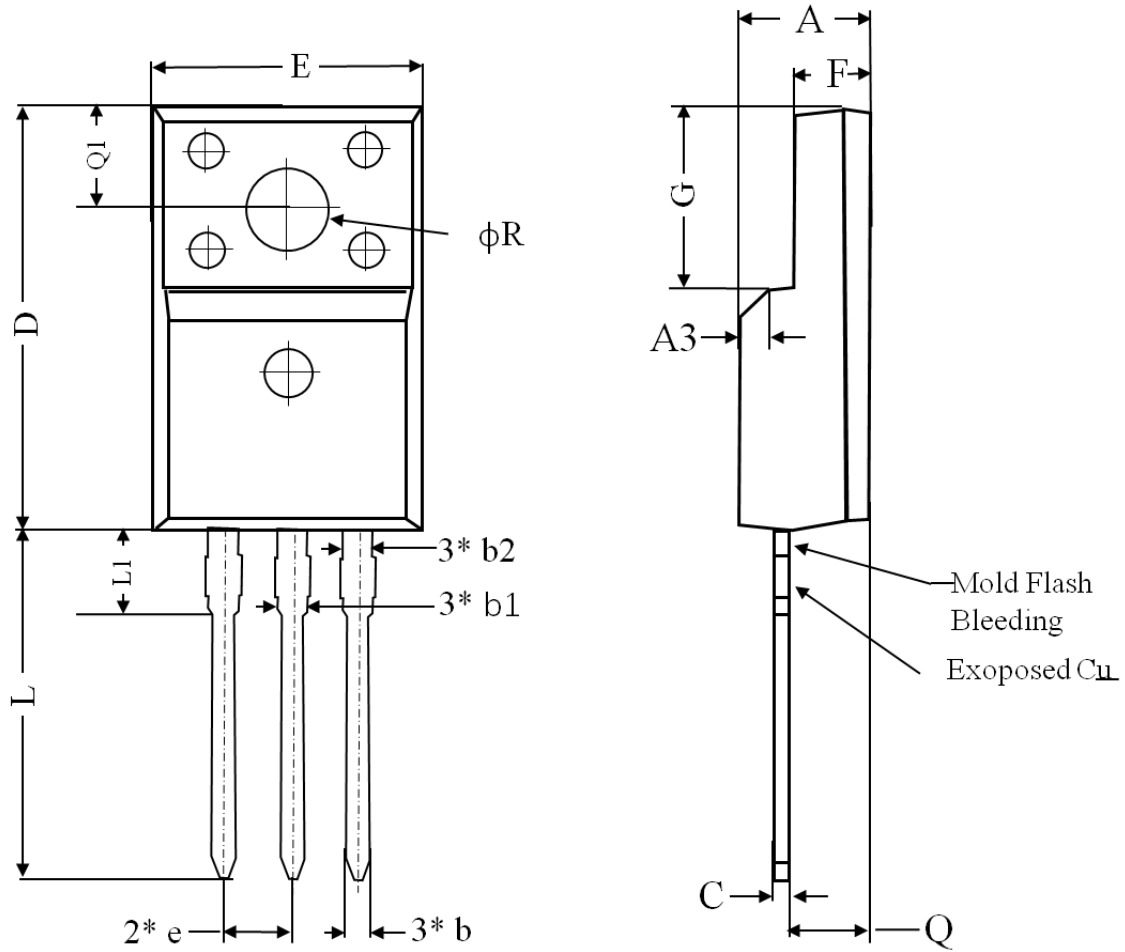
Outline TO-220 FullPAK Dimensions in mm
